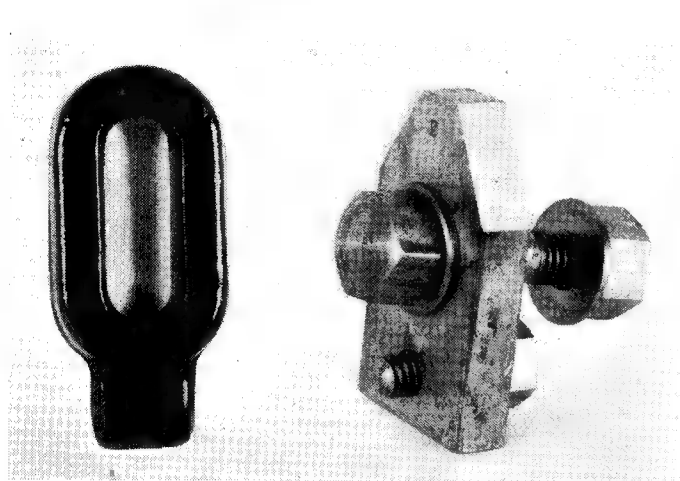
Left—a plain faceplate clamp. Right—a clamp with clamp-bolt and jack-screw
